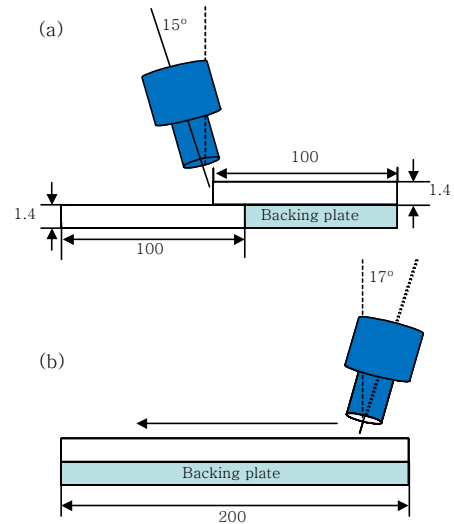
Schematic drawings of experimental procedure (a) front view,(b) side view
